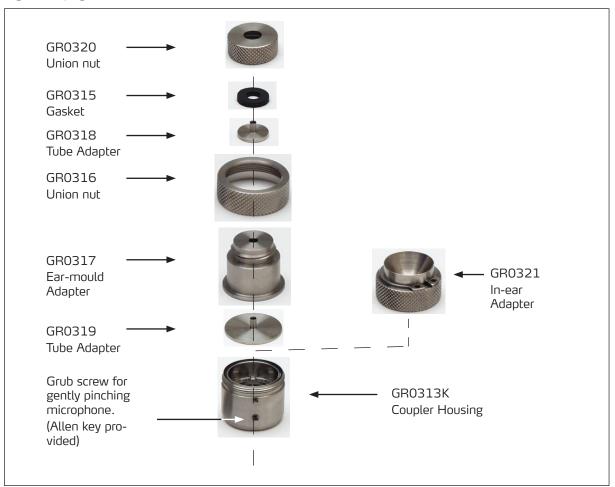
Exploded view of all the user-serviceable components of the RA0038
